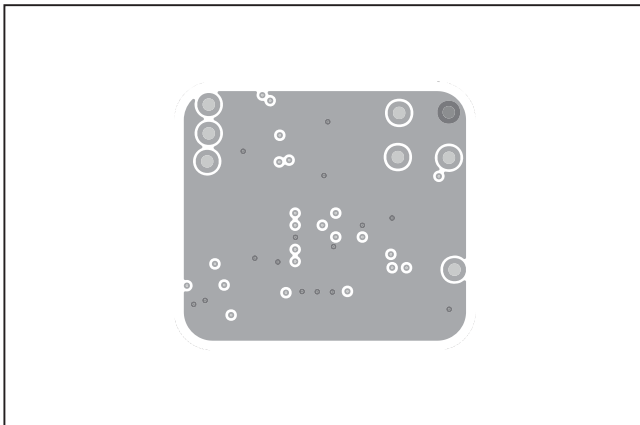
MAX30102 Daughter Board PCB Layout—Layer 3
